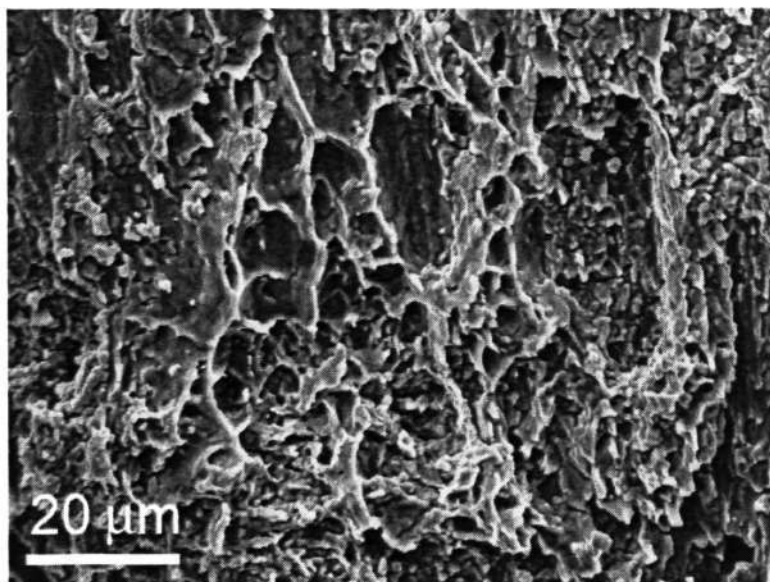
SEM (SEI) image showing the typical intergranular fracture on the solder/copper joint fracture surface.
